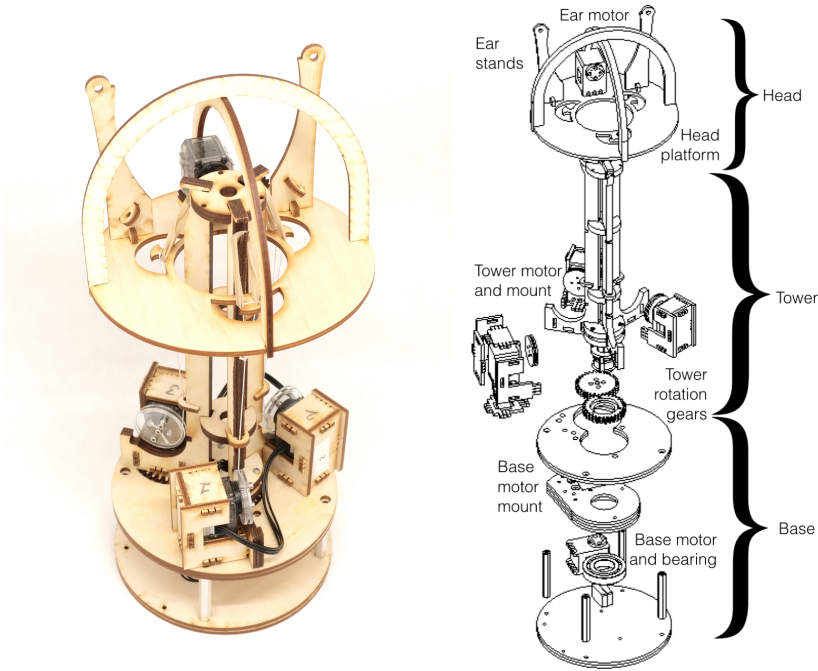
The inner tensile actuation mechanism and exploded view. The main expressive element is the head platform which is suspended from a tower by rubber bands and actuated by cables driven by motors at the bottom of the tower. The tower itself is rotated by the base motor. As an example of an appendage, the head platform features ear stands and a motor for actuating the ears.
